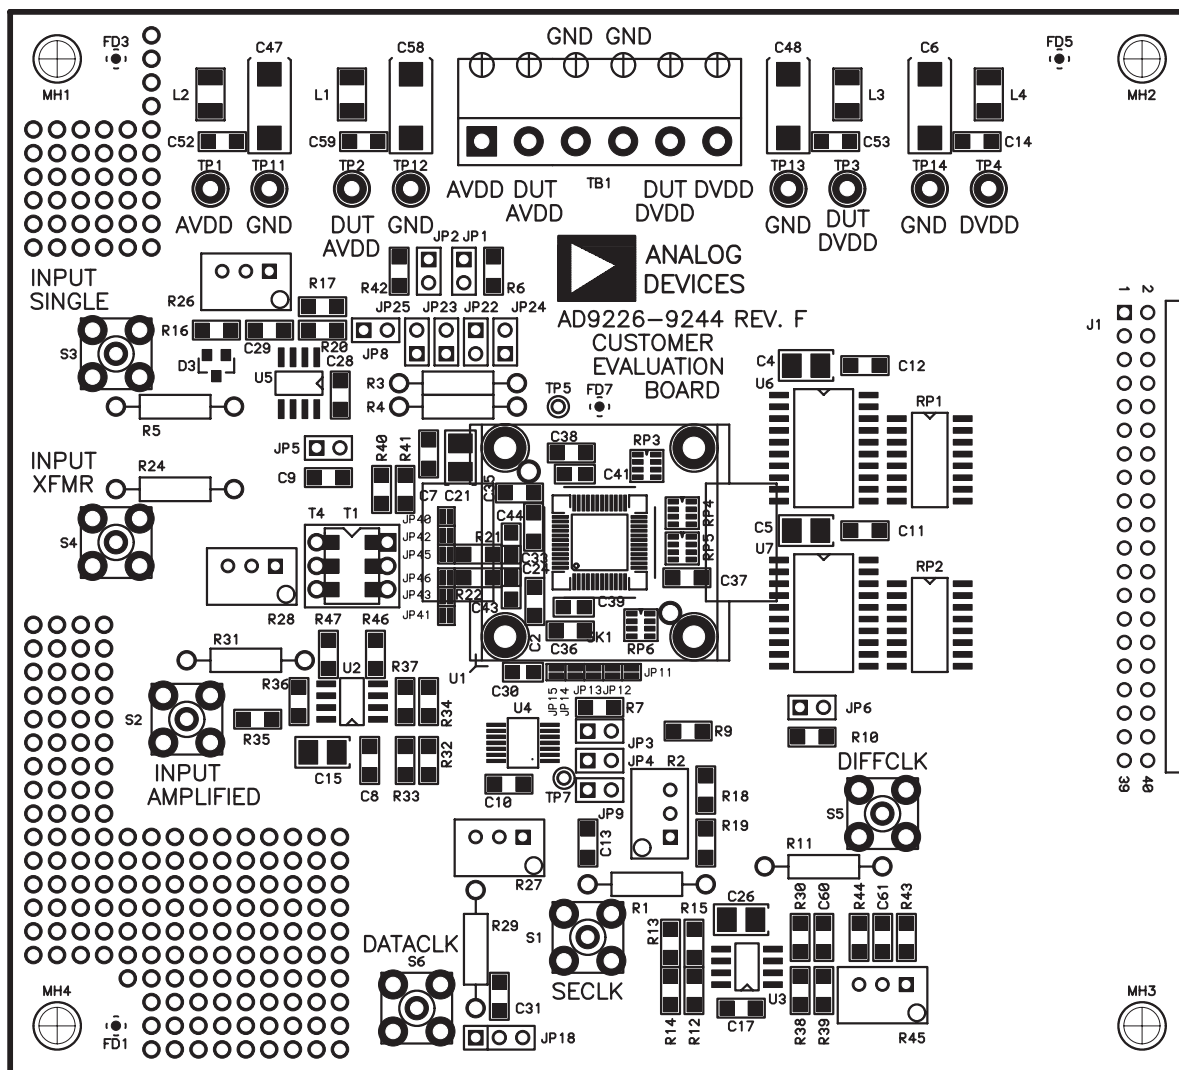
AD9244 Evaluation Board, PCB Assembly, Top
